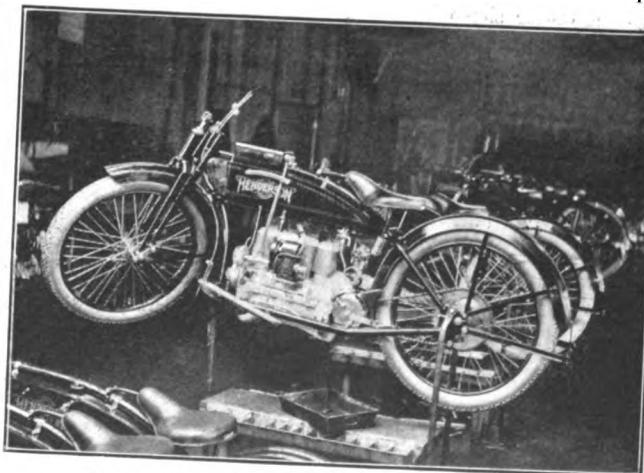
MOTORCYCLE ON ASSEMBLING STAND
